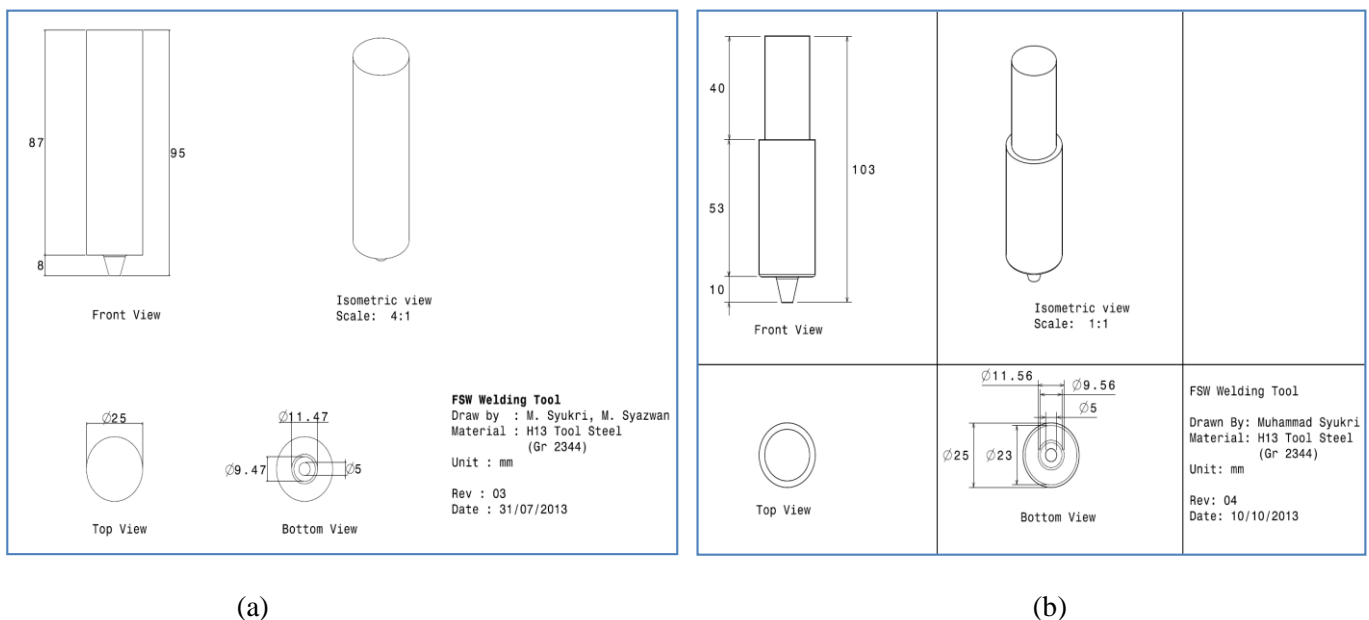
(a) Detail design of welding tool; and (b) Detail design of the modified welding tool.
